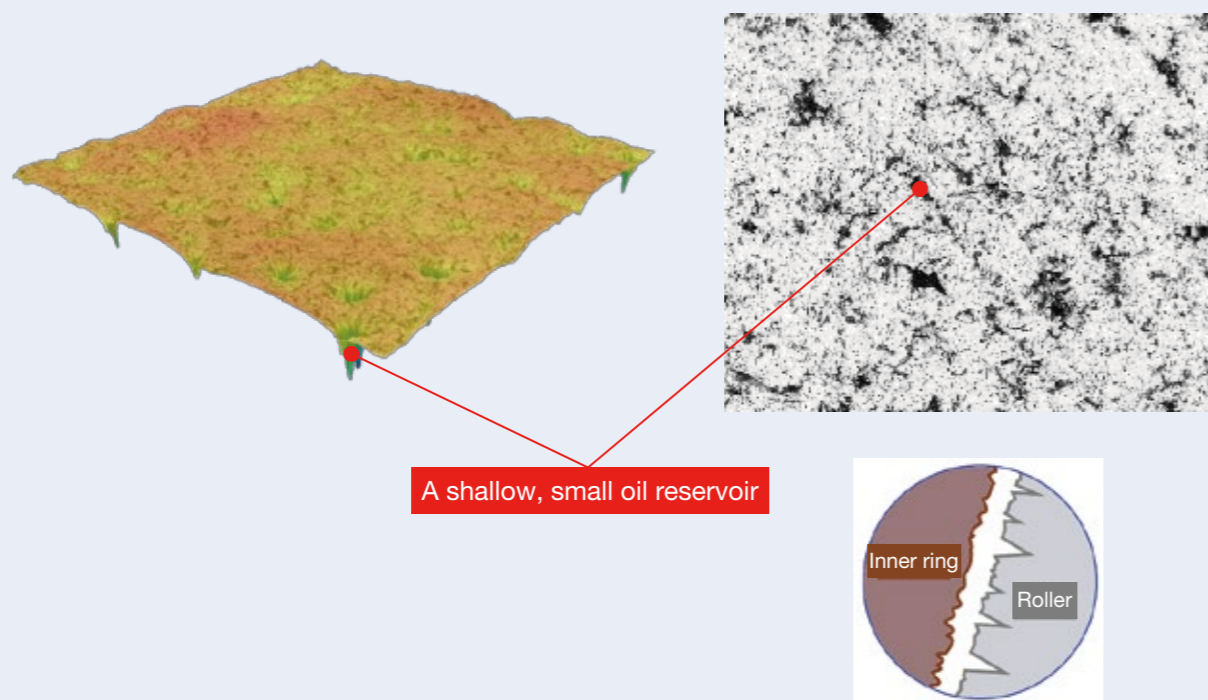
NSK LCube II™ 3D surface and enlarged surface photograph
